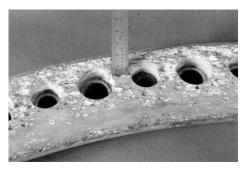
Severe pitting on the surface of the aluminum alloy ring gear. Source: Ref 2
